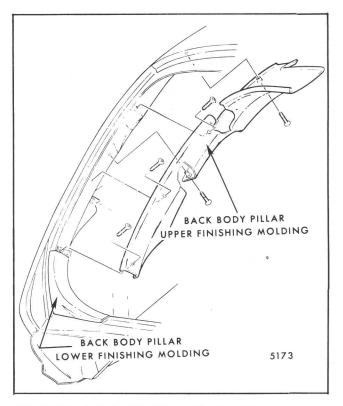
Back Body Pillar Upper Finishing Molding - Left Side Shown
